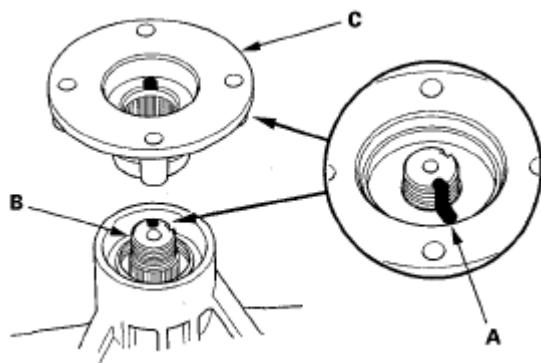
Identifying Reference Mark On Input Shaft And Companion Flange
